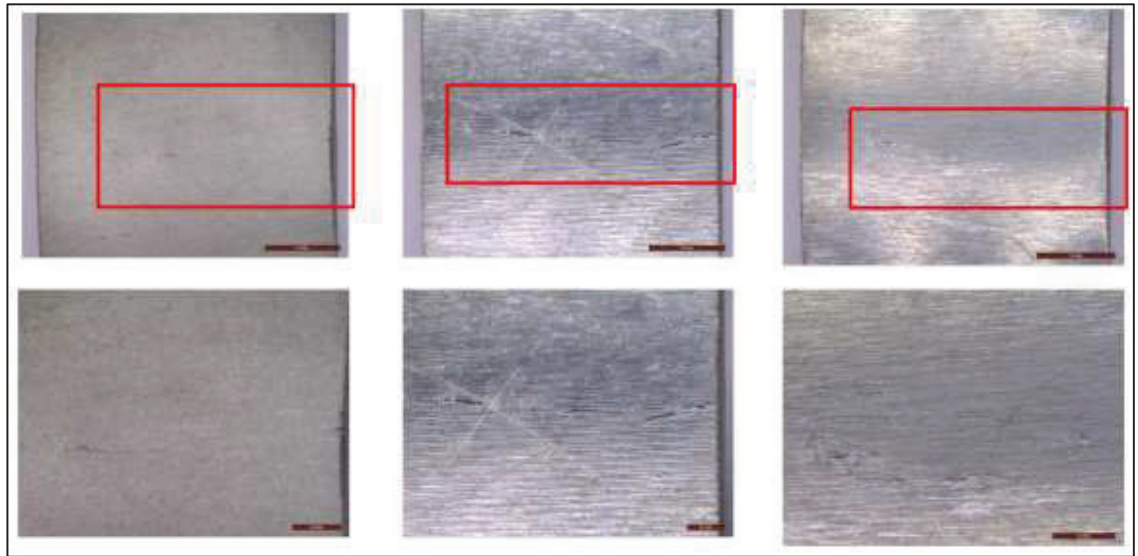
Crack formation in Start, Middle, and End sections of 71A 4053 2767 snake tool batch after V-Bend test
